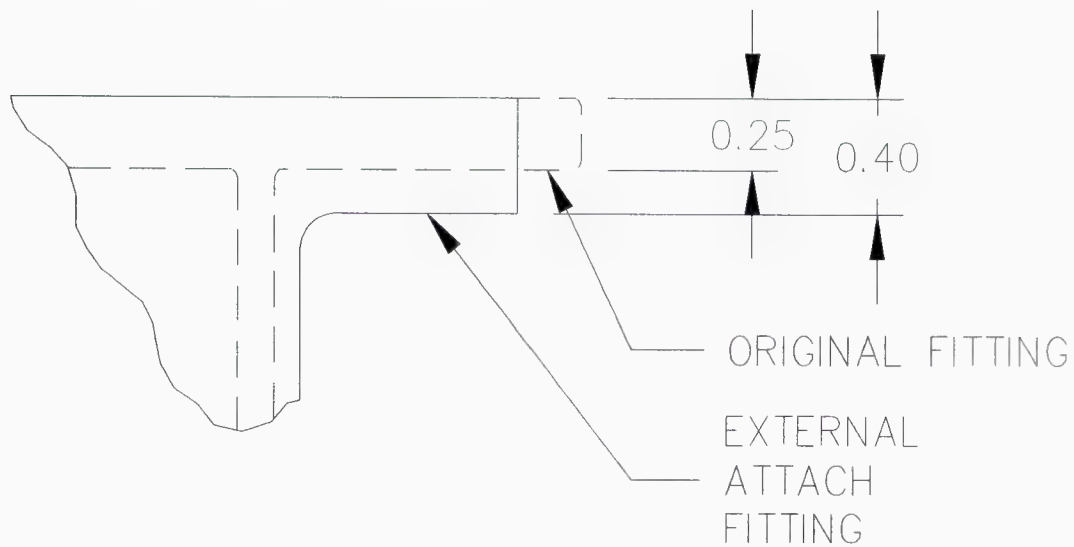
Changed Geometry of Forward Fitting Flanges (Aft Ftg Similar)
